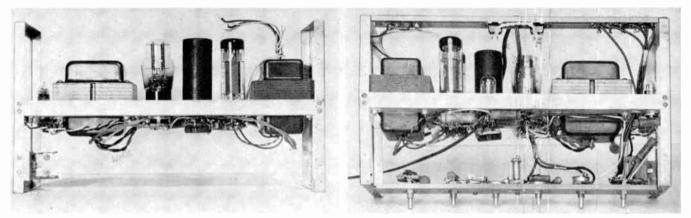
, left: Completed assembly and wiring of the chassis. Fig. 5, right: The final stage, with the front and rear panels in place and wired
